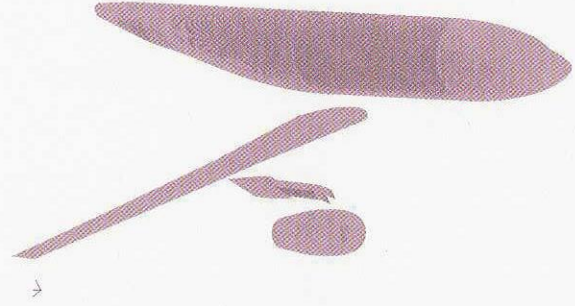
Exploded view of DLR F6 model, comprising fuselage, wing, engine nacelle and pylon.
